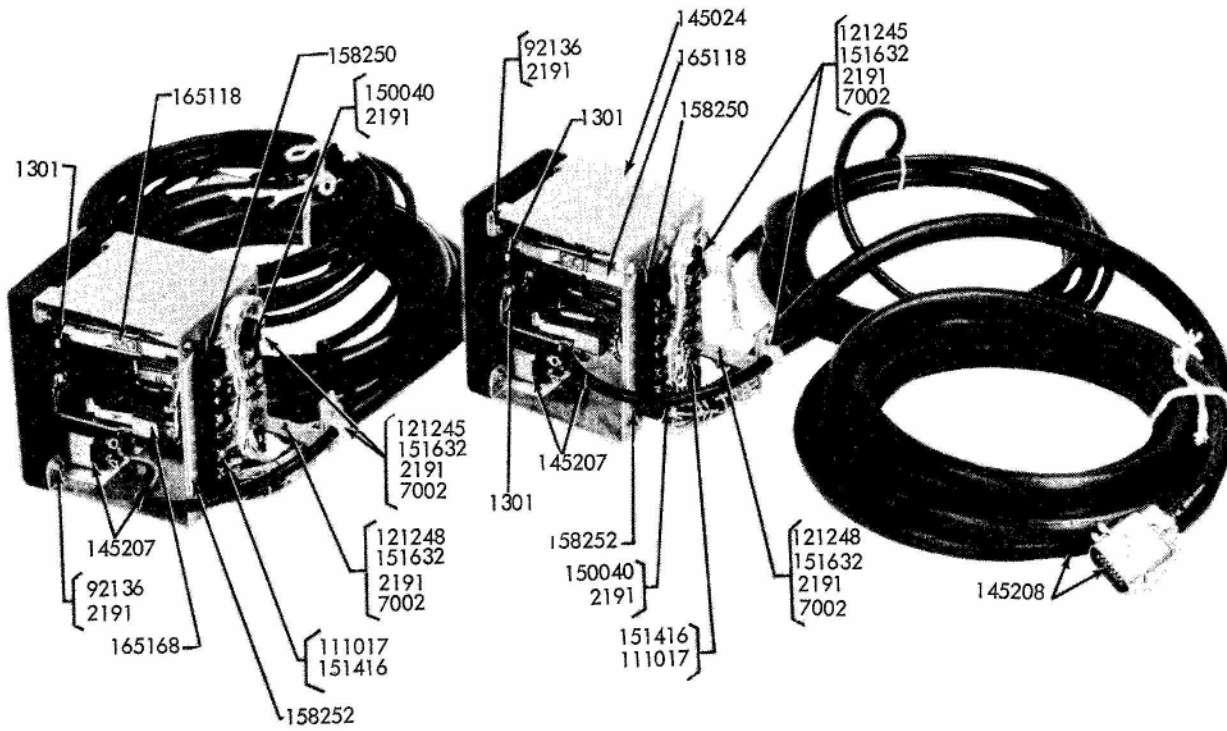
144600 MODIFICATION KIT TO PROVIDE KEY AND LAMP ASSEMBLY
